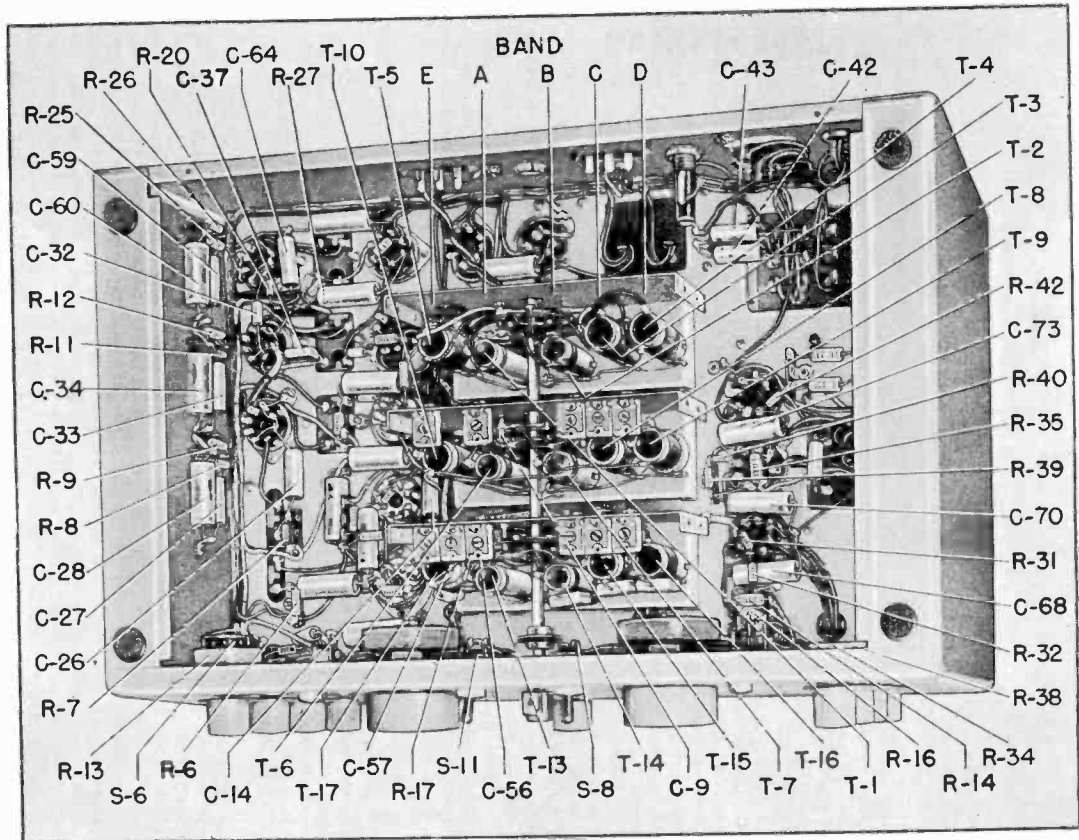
Bottom View of Receiver, Coil Compartment Side Plates Removed.
